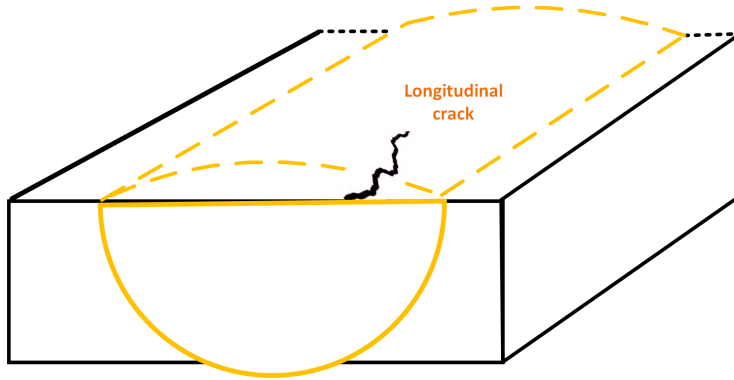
Longitudinal cracking in weld.
